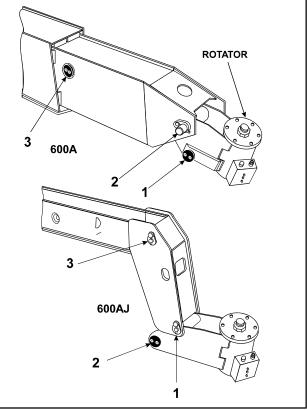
Reassembly of Components - Rotator and Slave Leveling Cylinder
